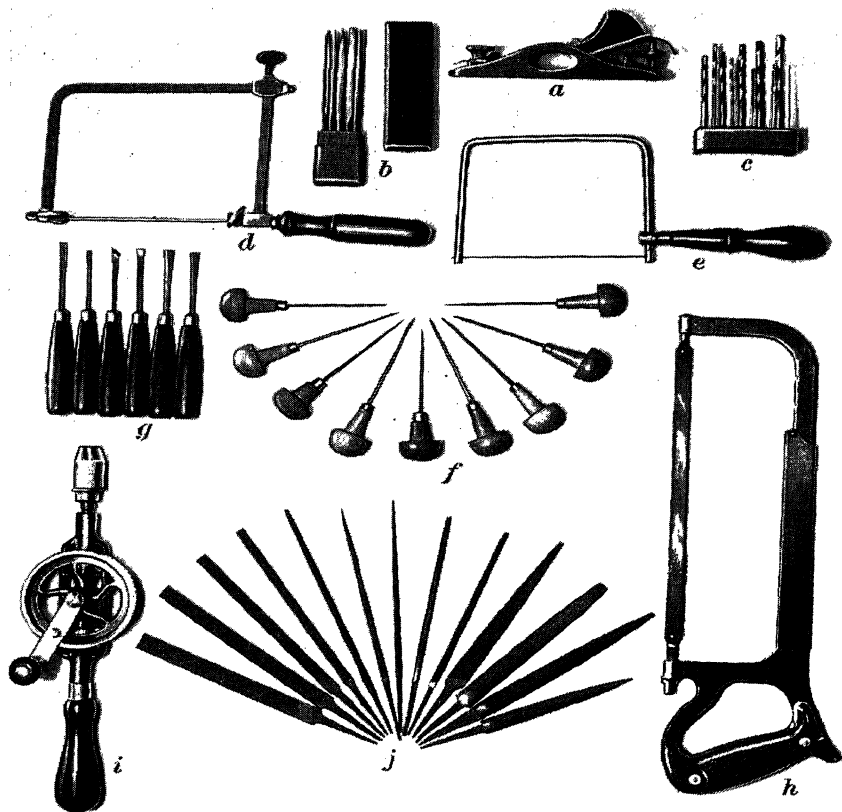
Hand shaping tools: (a) block plane, (b) needle files, (c) twist drills, (d) jeweler's saw, (e) coping saw, (f) gravers, (g) carving set, (h) hack saw, (i) hand drill, (j) files.
